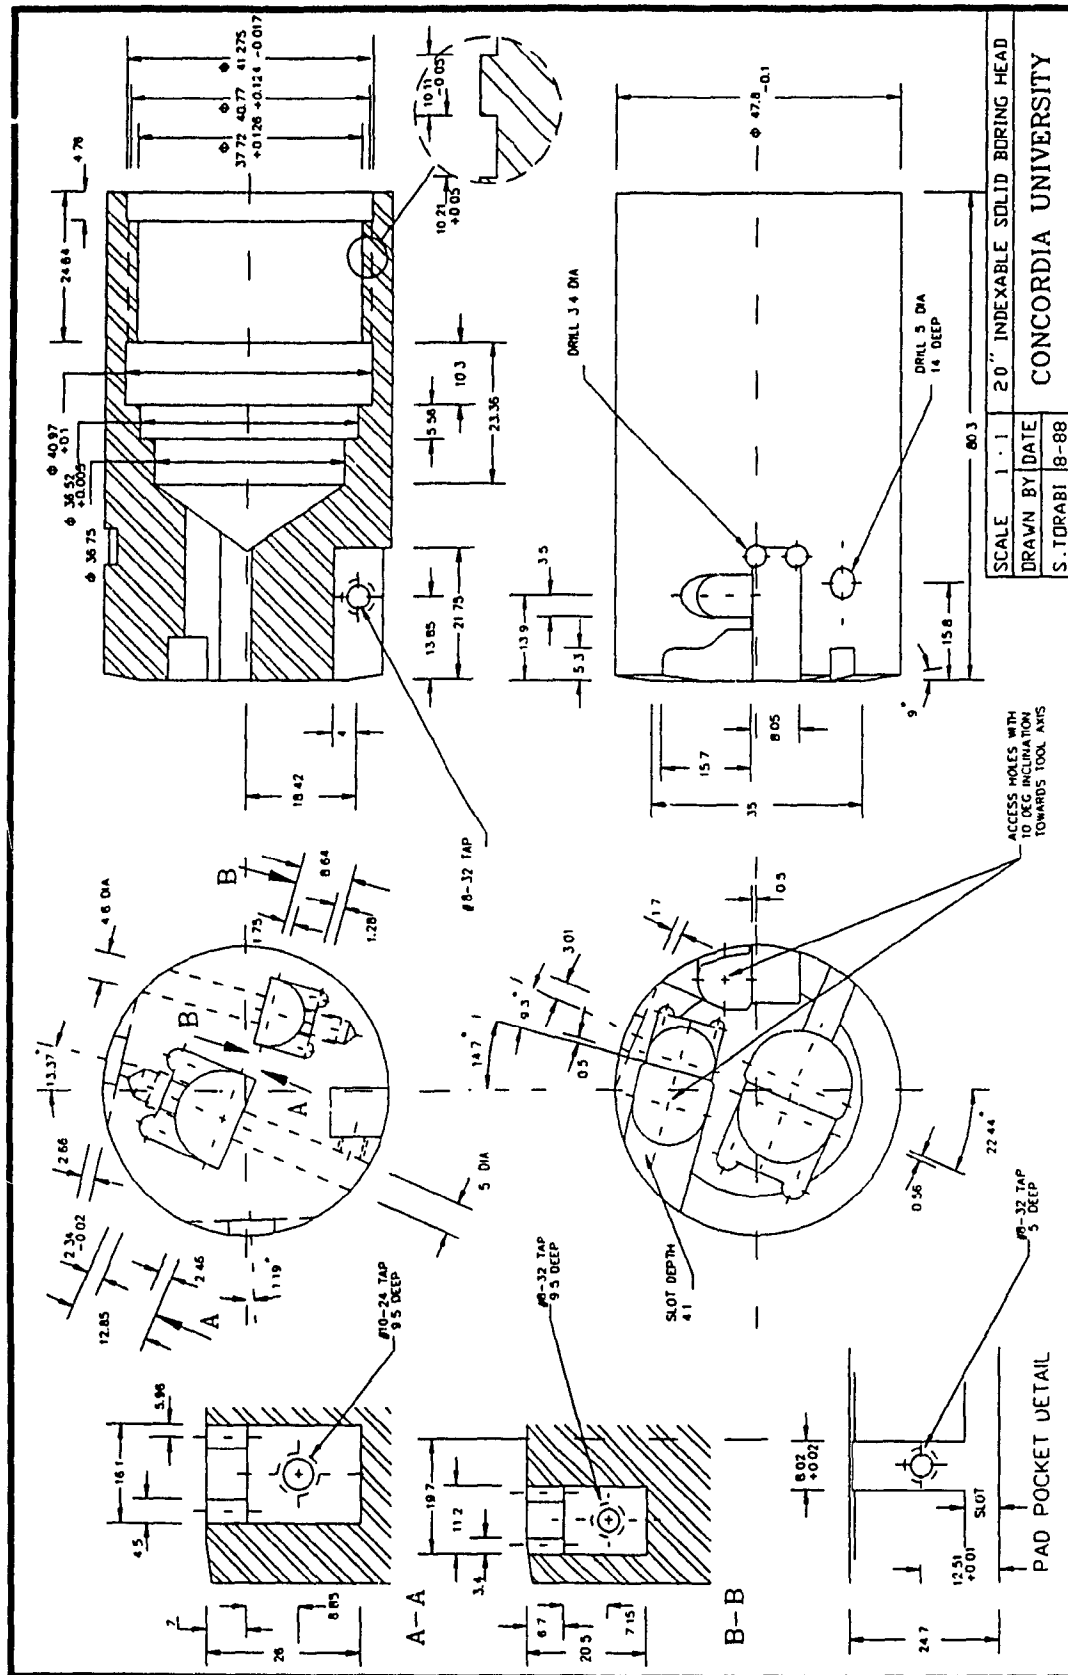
DETAIL DRAWING OF THE DESIGNED TOOL
